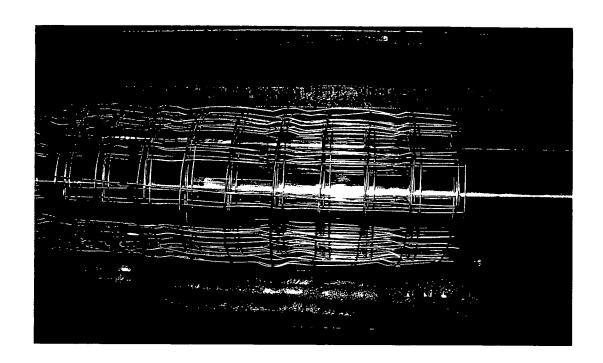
Davis Welded Sample on Coiler Mandrel.
